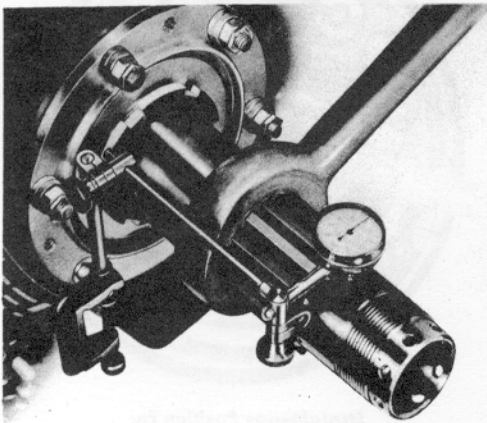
Checking Crankshaft Run-out at Front Cone Location
